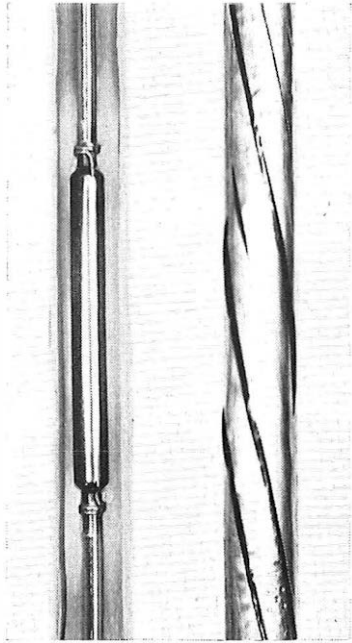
INNER AND OUTER CONDUCTOR JOINTS FOR CANTAT LIGHTWEIGHT CABLE AFTER BENDING TEST
